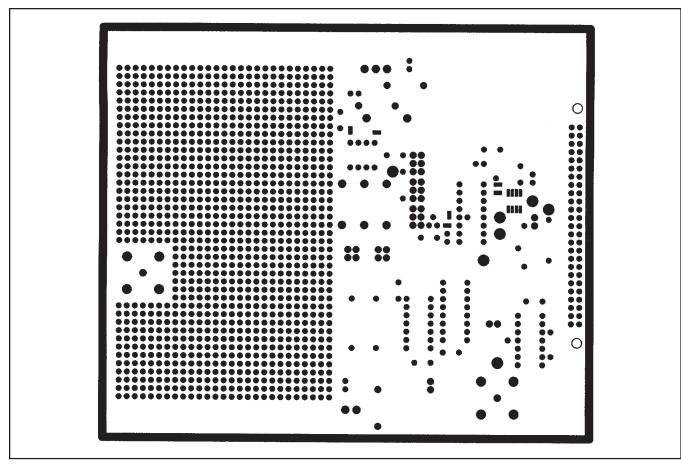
Top Soldermask of the DEM-ADS7812/13P Demonstration Board.
